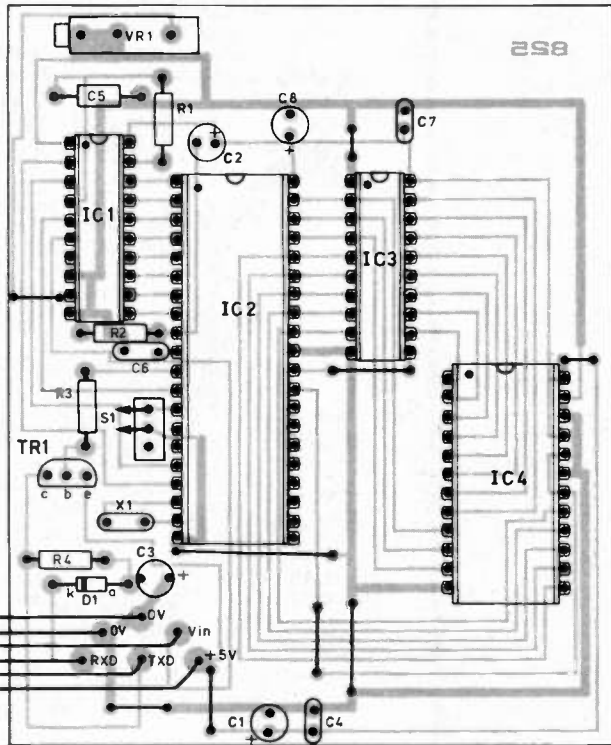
Printed circuit board layout and wiring of the Universal Data Logger.
